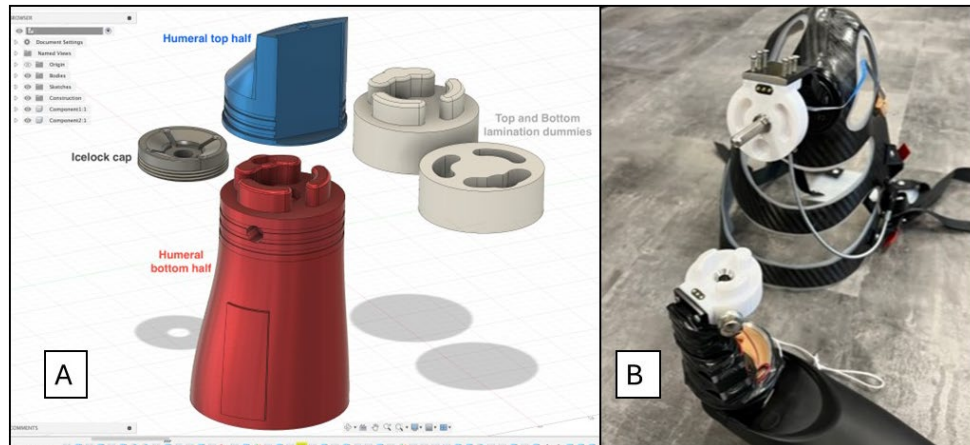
Design process for humeral disconnect. A) CAD drawings B) trial on test socket with components in place
